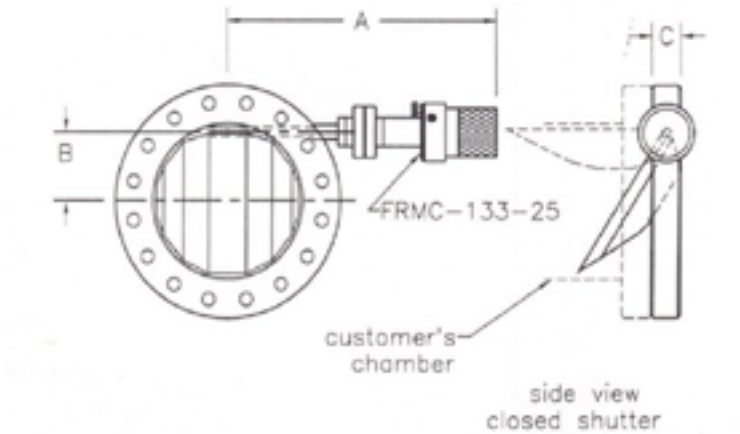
Dimensional drawing of VRS viewport shutter
